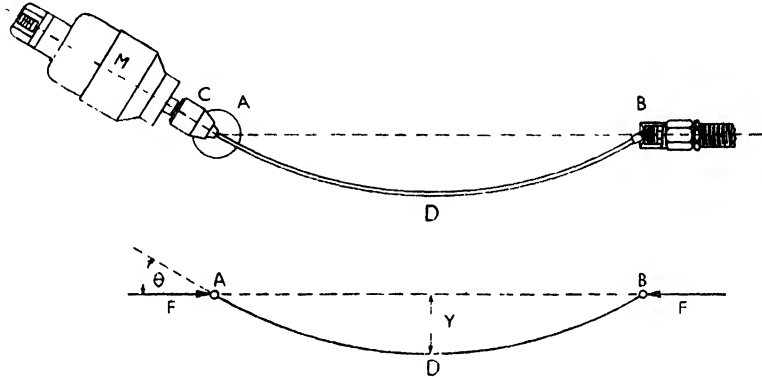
PRINCIPLE OF THE HAIGH-ROBERTSON WIRE FATIGUE TESTING MACHINE
